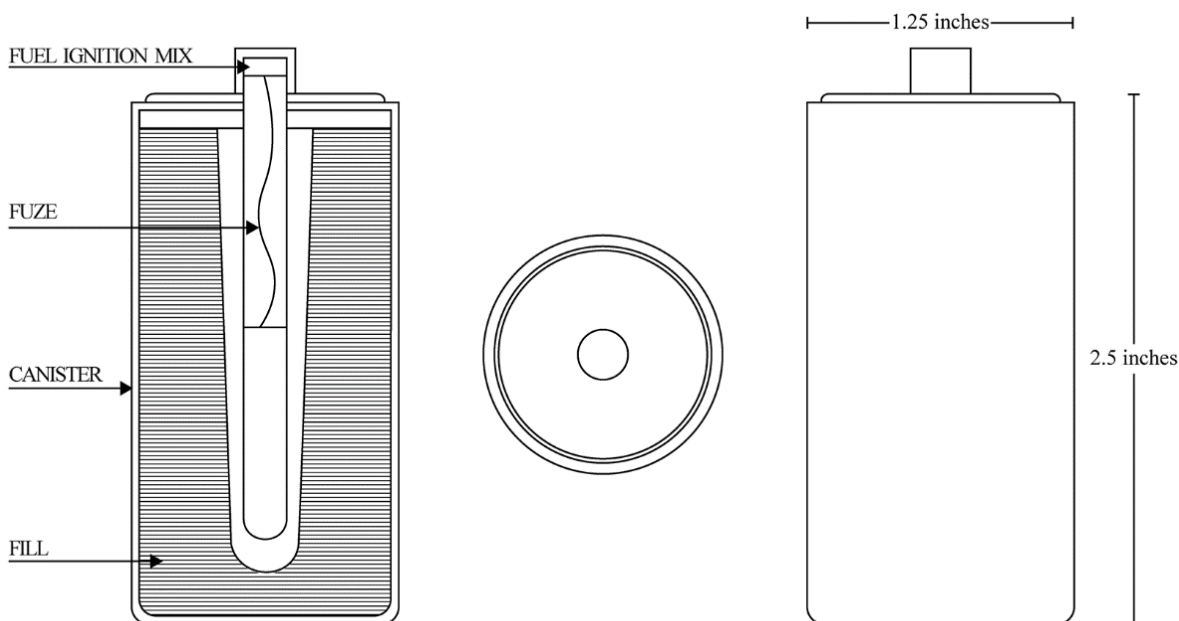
Bomblet, Chemical, BLU 50/B - Line Drawing
